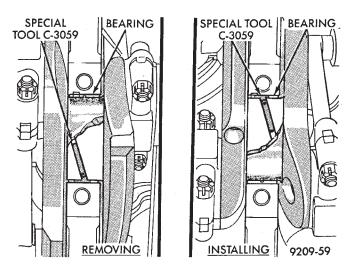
Upper Main Bearing Removal and Installation with Tool C-3059
